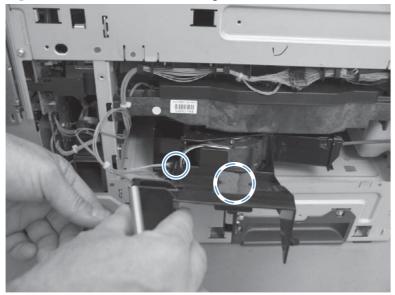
Remove the cartridge fan and environmental sensor (3 of 7)
